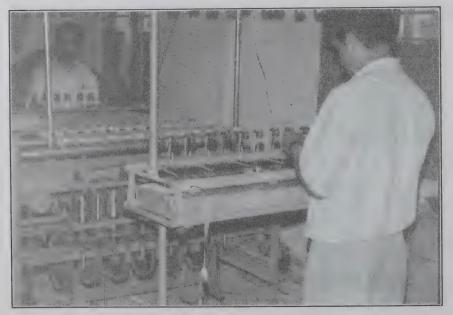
SILMAC Type Reeling cum-Twisting Machine
